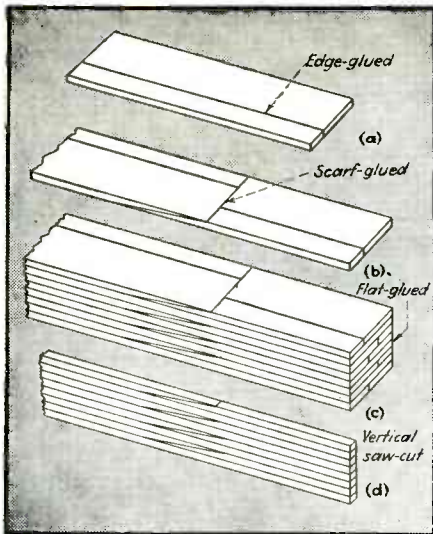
(above)—Steps in the construction of multi-laminar spar showing (a) narrow boards edge-glued to obtain 6-in. widths, (b) short boards scarf-glued to obtain 16½-ft length, (c) ¾ x 6-in. boards flat-glued to obtain 6 in. x 6 in. x 16½-in. block, (d) block sawed vertically to obtain edge-grain laminated spars ¾ in. x 6 in. x 16½ ft
